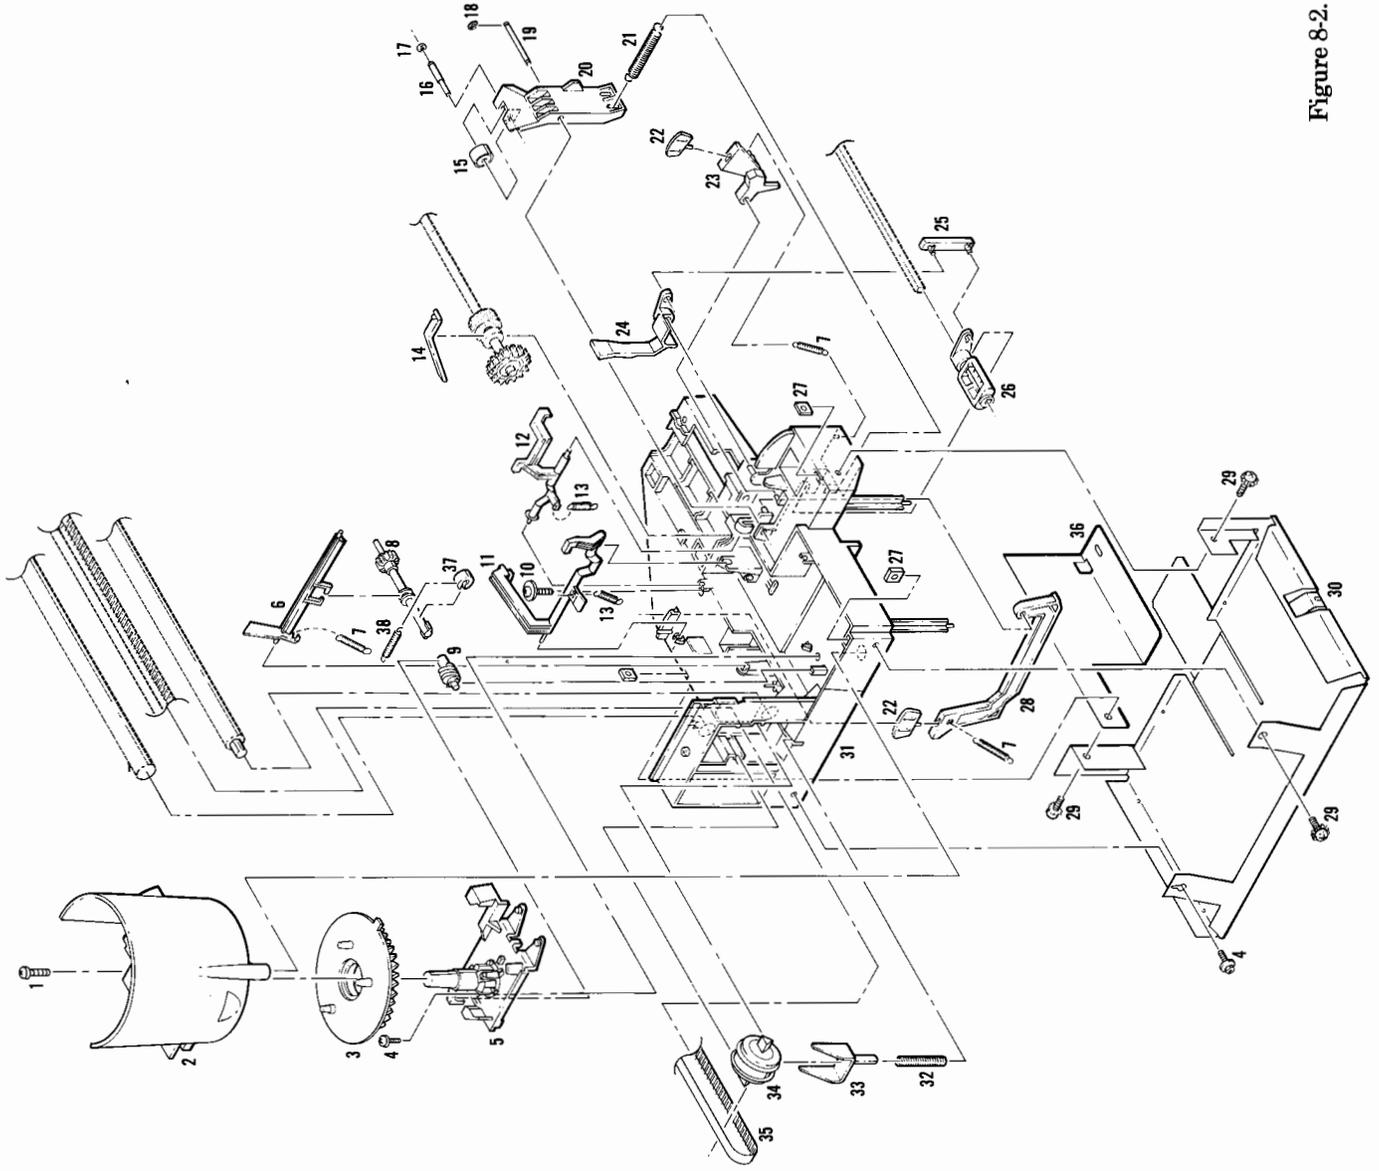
Left-Hand Chassis Assembly, Illustrated Parts Breakout
